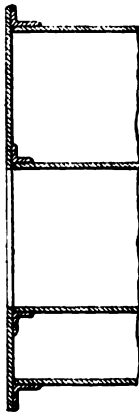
ATTACHMENT OF FRONT-END PLATE.
